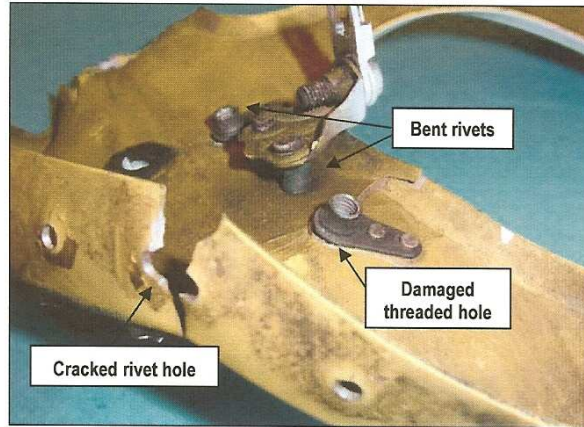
Damage observed in one area of the tail rotor gear box attachment (magnification: approximately 1x).
